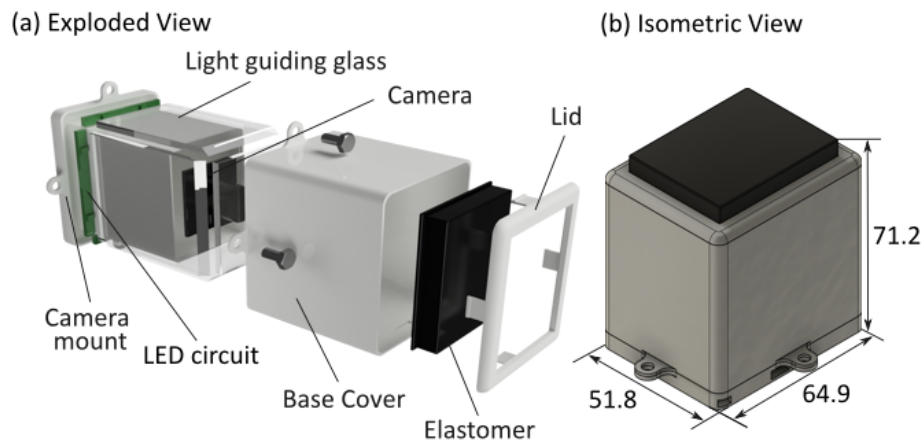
Assembly of NUSense tactile sensor with a camera and elastomer. (a) Exploded view and (b) isometric view of the NUSense. All measurements are in millimeters.
